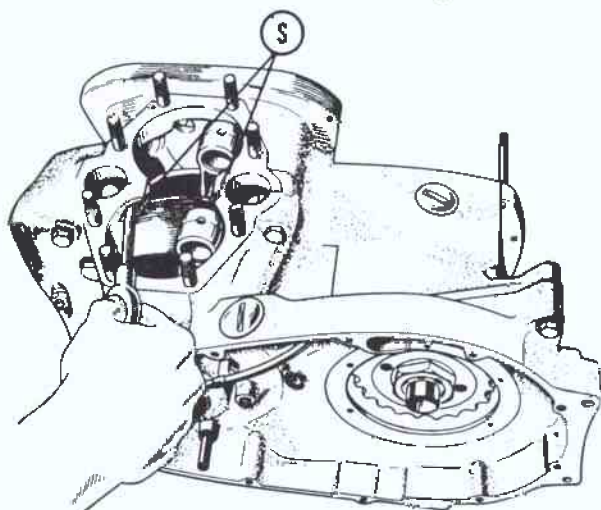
Make certain that the two screws (S) are removed when separating crankcase halves.
